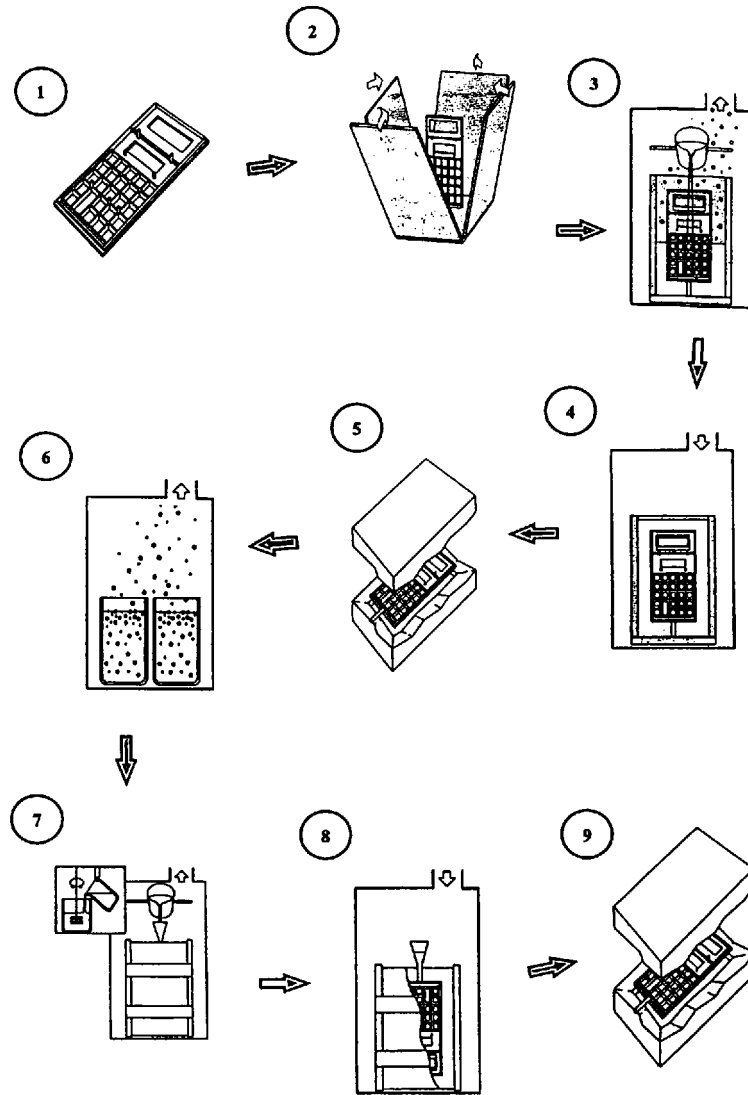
Vacuum casting process. (Courtesy of MCP)
